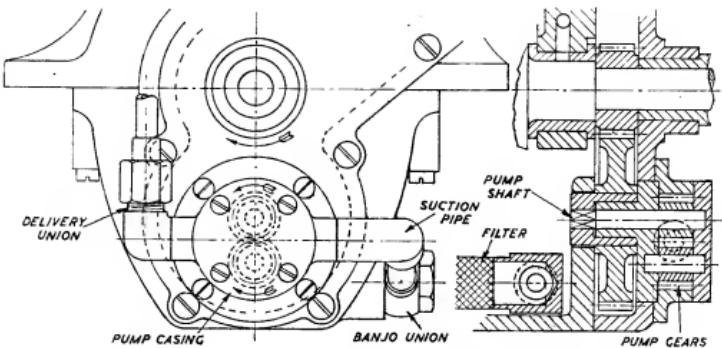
Face view and section of oil pump, assembled in position on the lower part of timing case.
